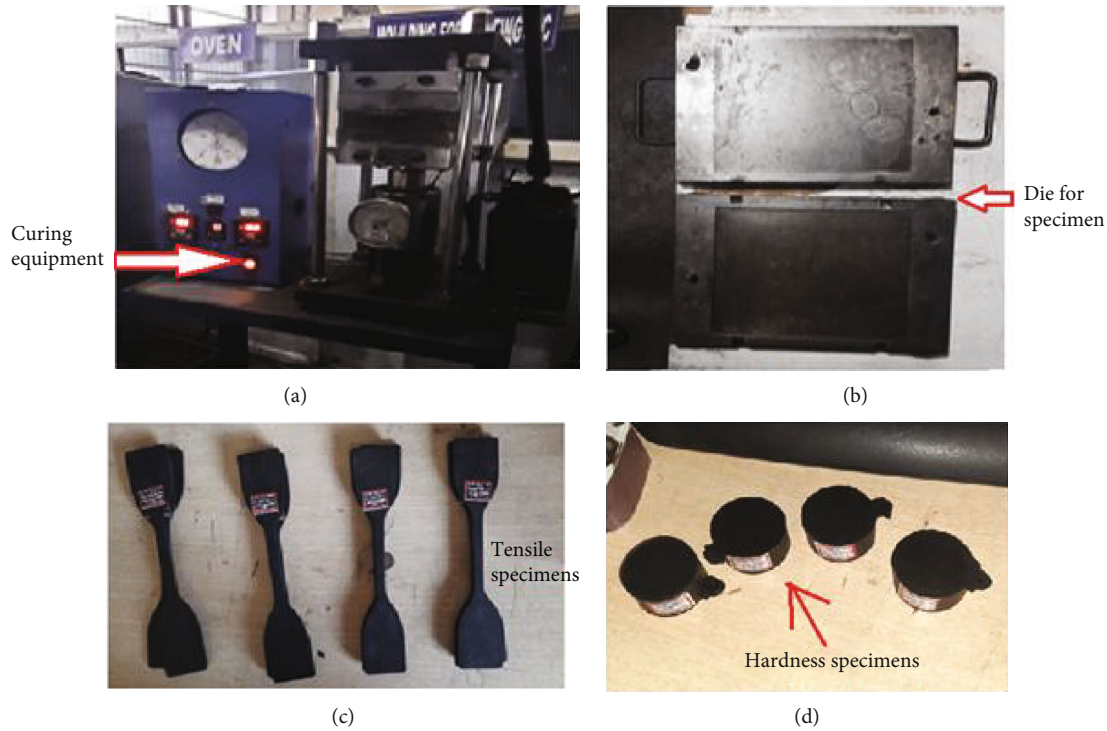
(a) Curing equipment. (b) Die set. (c) Tensile specimens. (d) Hardness specimens.
